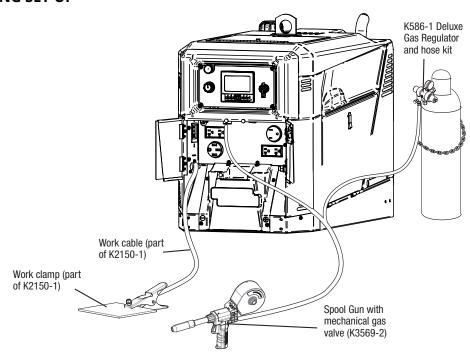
Spool Gun Setup - Electrode Positive (+) shown
